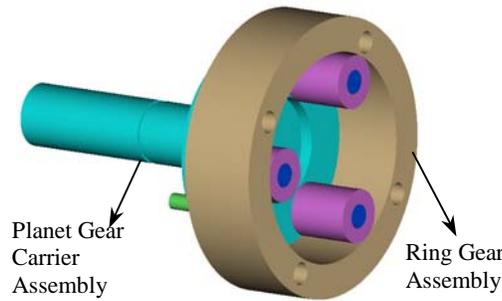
Planet Gear Carrier and Ring Gear Assembly.
